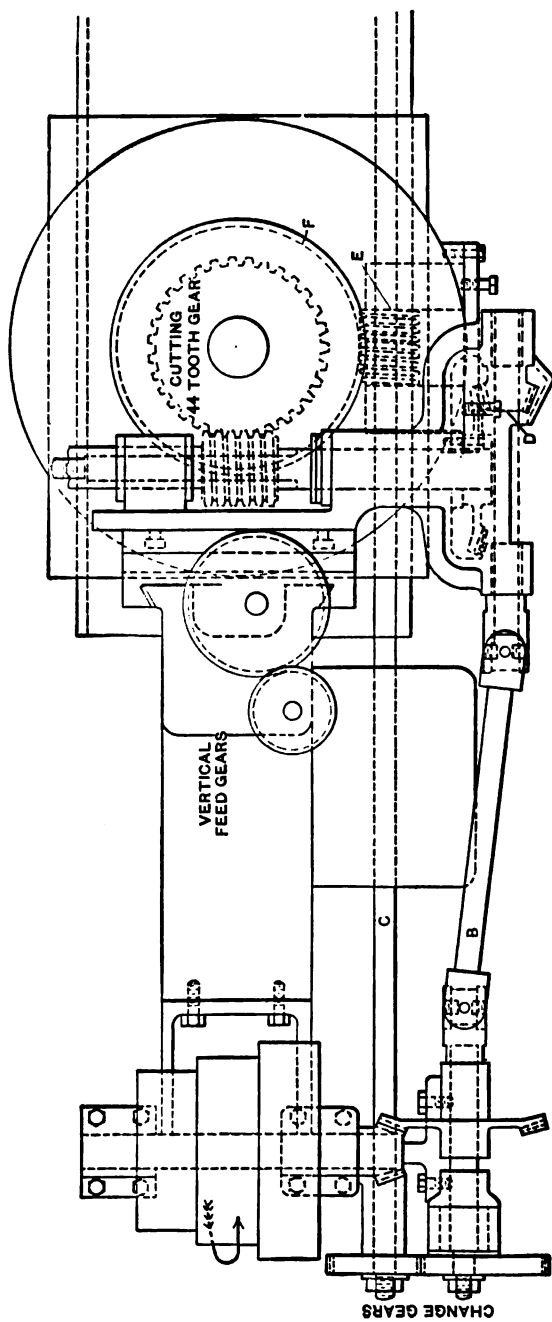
Hob and Table Driving Arrangement of a No. 8 Farwell Gear-hobbing Machine.
